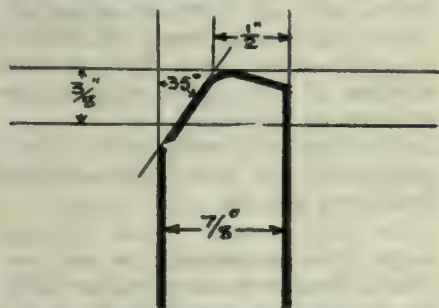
A TOOL SIMILAR TO THAT DEVELOPED IN FIG. 6. BUT HAVING A SMALLER SECTION.
